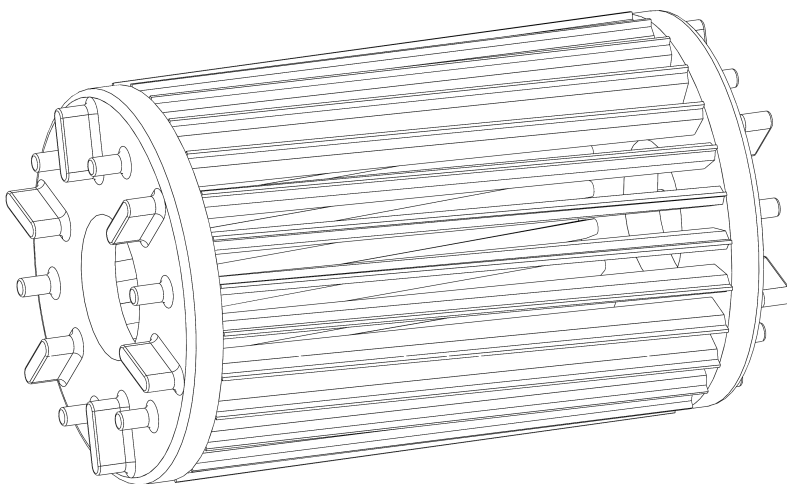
Illustration of rotor bars in a squirrel cage rotor
